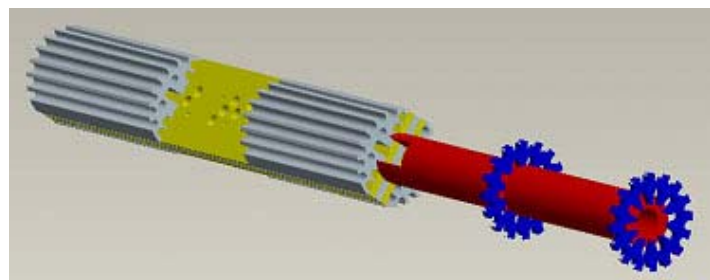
Assembly showing an MPFD3-T with the alumina wire guides and alumina tubes.
